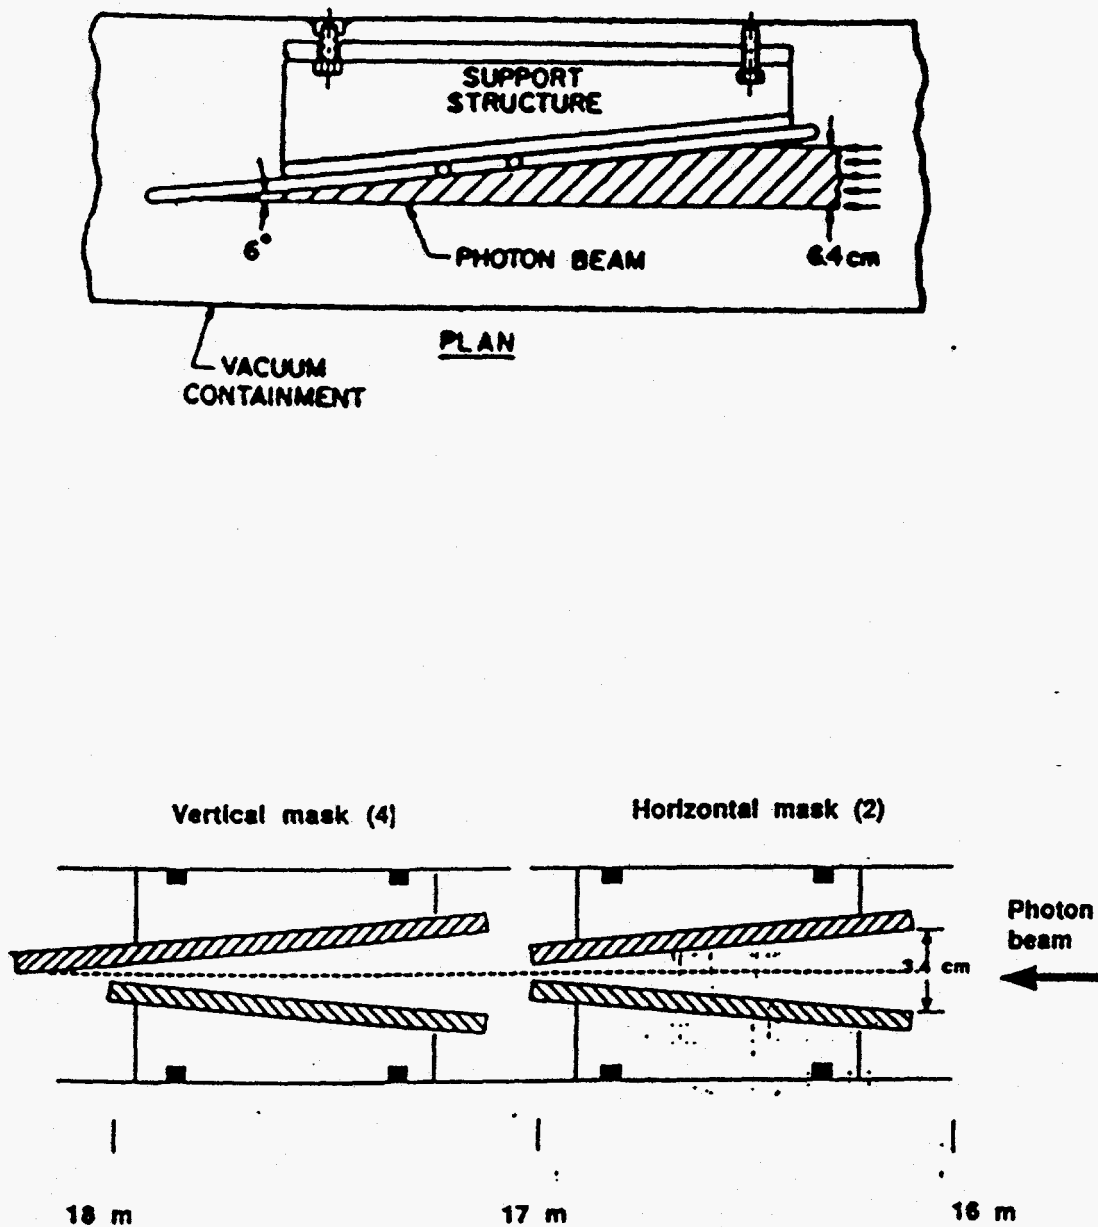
Partial layout of a fixed vertical and horizontal fixed mask assembly.
